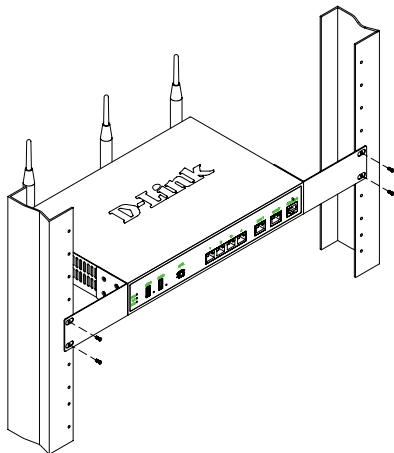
Installing the Wireless N Services Router in a standard-sized equipment rack
